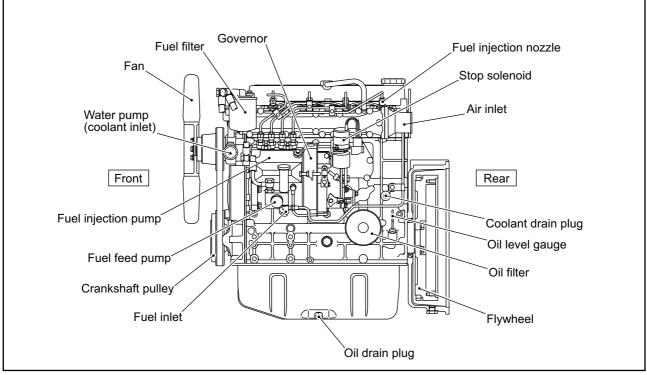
Engine left view S4S in-line type fuel injection pump right view
